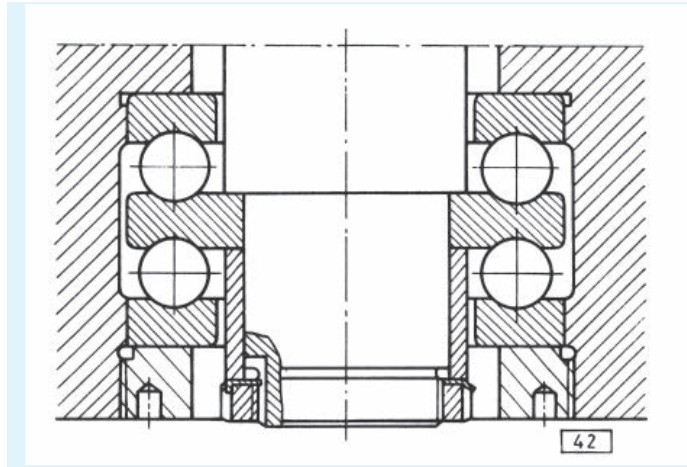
Setting axial clearance in thrust ball bearing "by sight"
